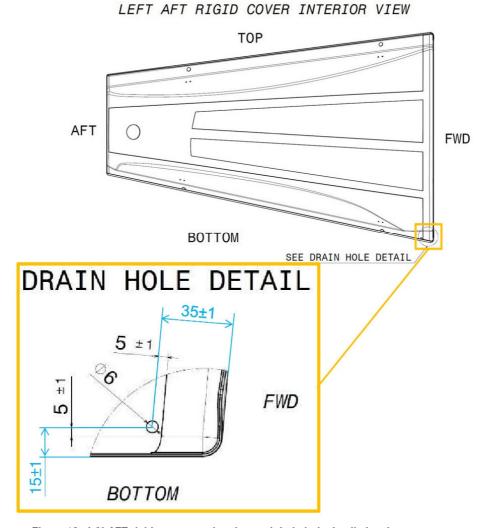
L/H AFT rigid cover exterior view and drain hole detail, drawing extract
